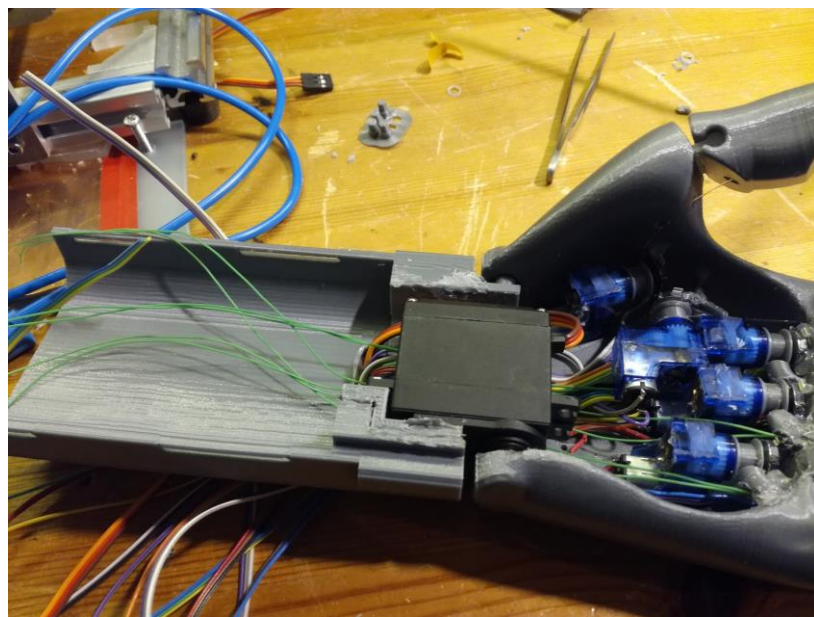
The completed assembled mechanical part of the prosthetic hand.
